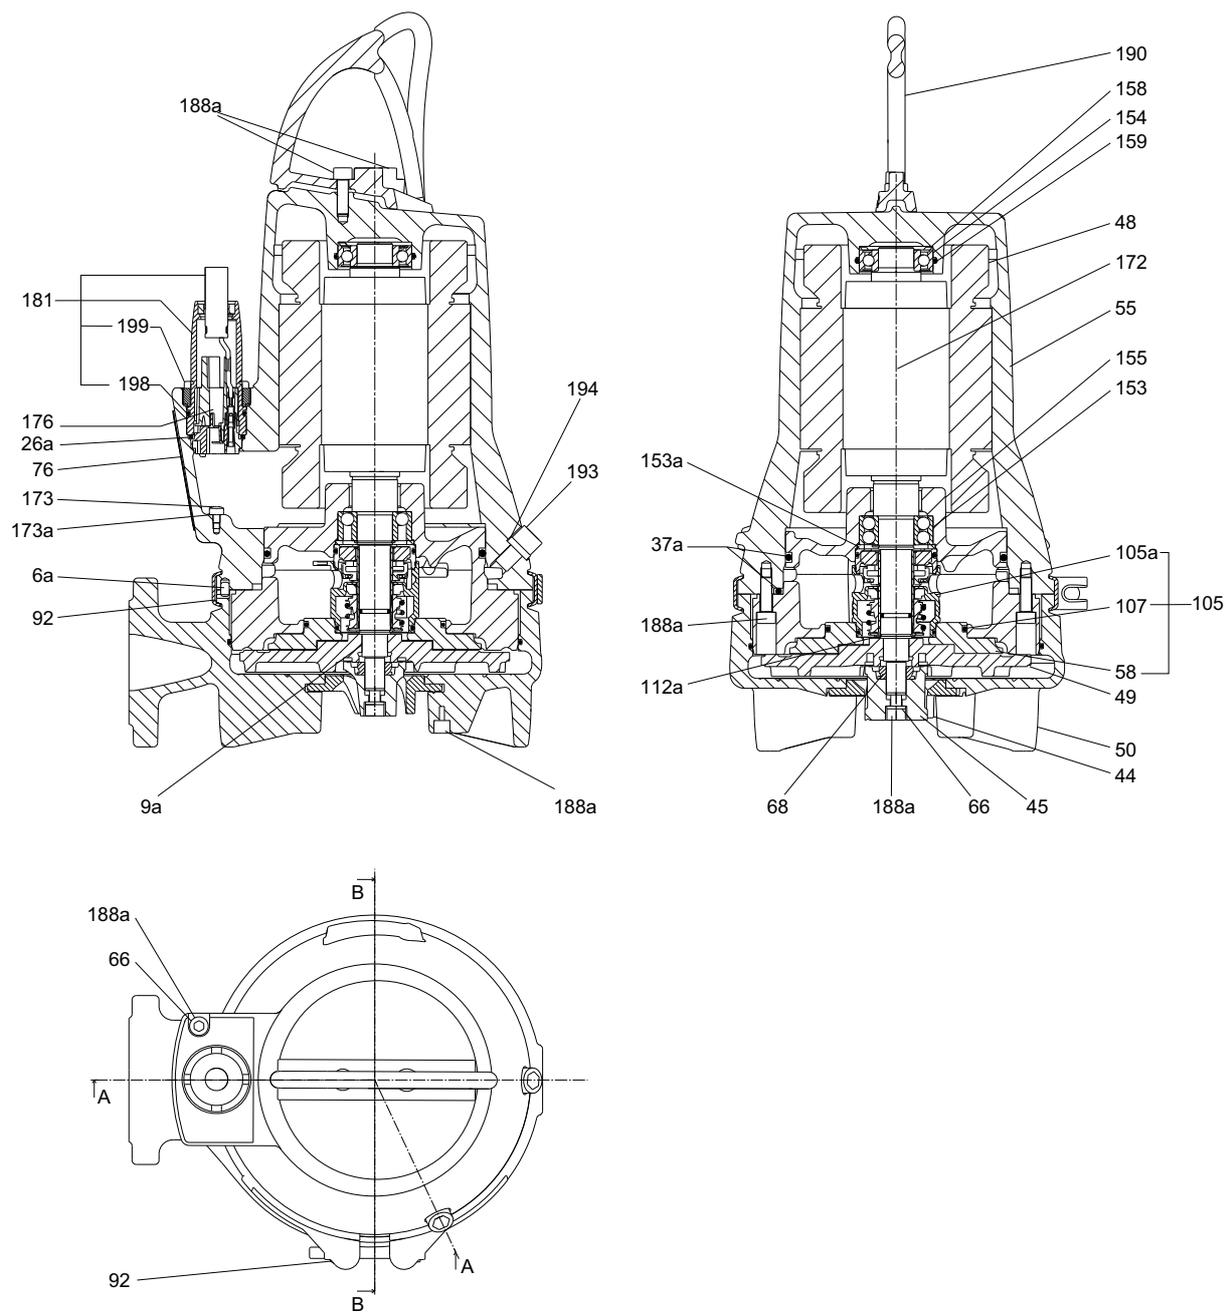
Sectional drawing of SEG pumps, 2.6, 3.1 and 4.0 kW
